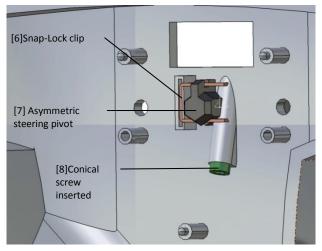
System-concept 21, Inside of the steering wheel when attached to the steering column pivot with conical screw and "Snap-Lock" clip.
